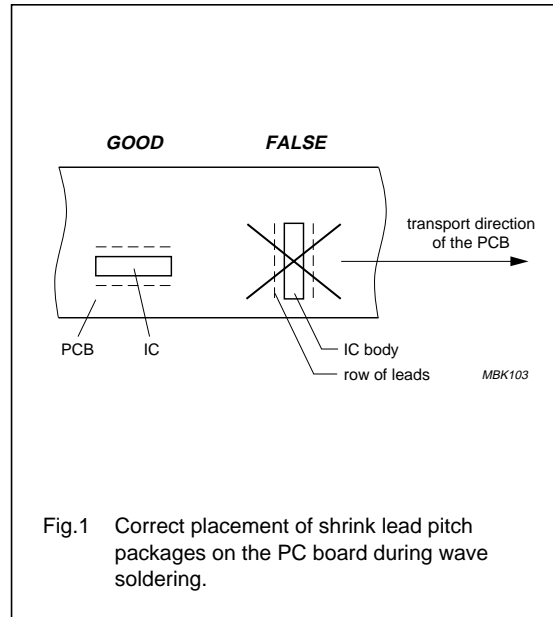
Correct placement of shrink lead pitch packages on the PC board during wave soldering.
